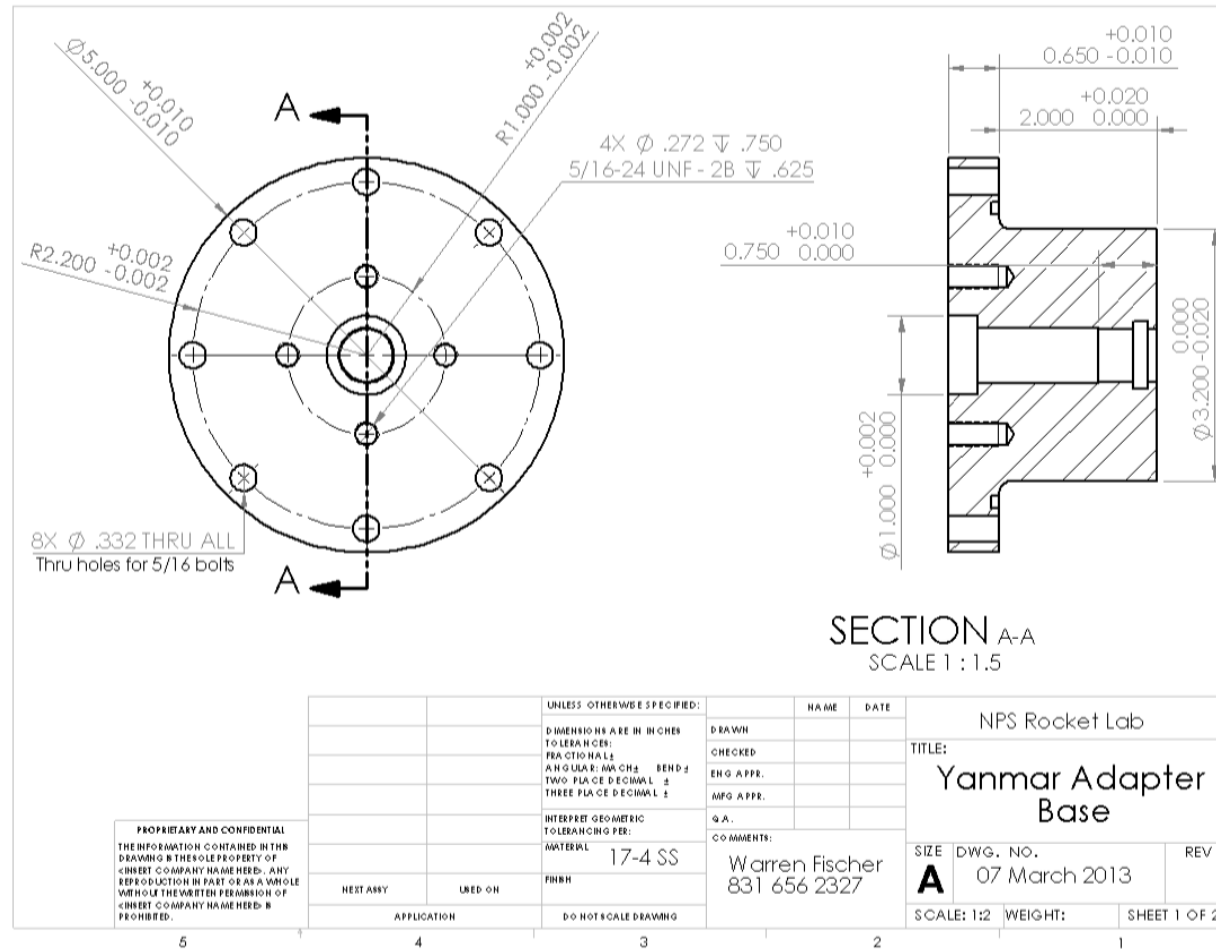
Yanmar Injector Adapter Fabrication Drawing (View 1 of 2)
